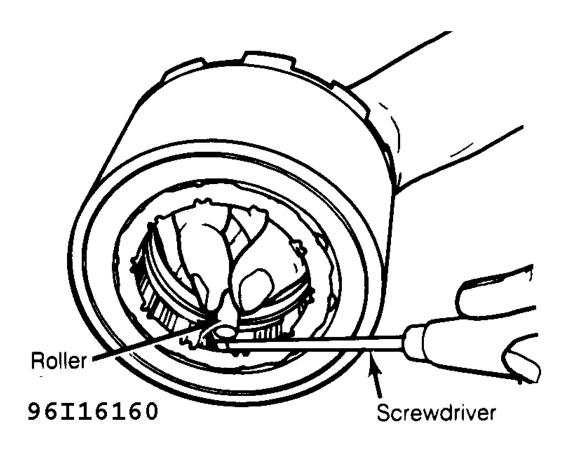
Installing One-Way Clutch Bearing Rollers Courtesy of FORD MOTOR CO.
